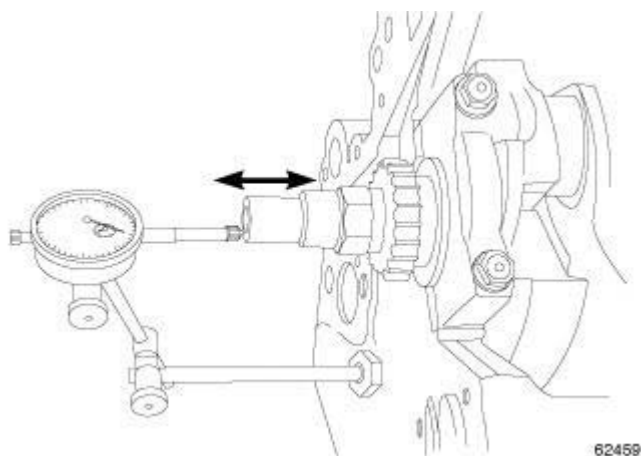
CRANKSHAFT END PLAY TYPICAL
